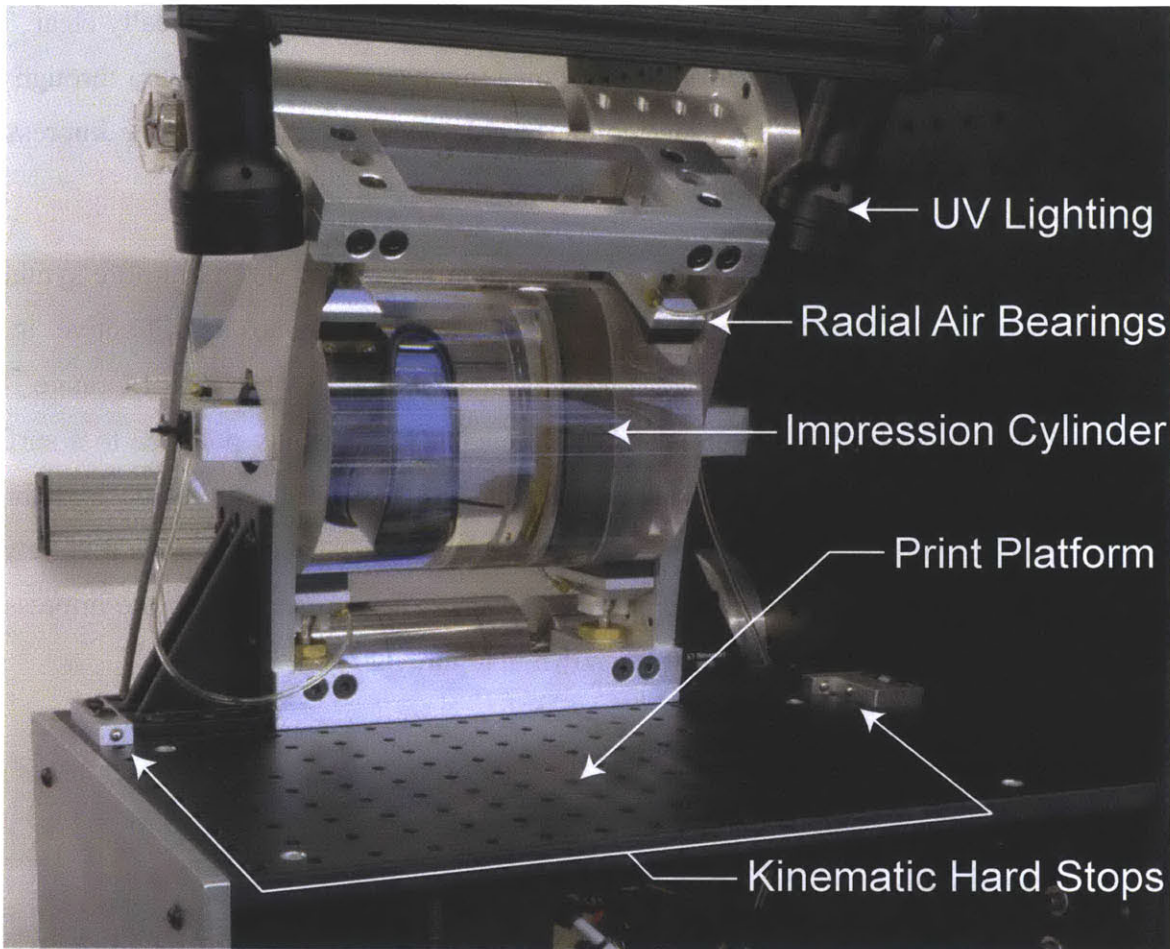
The impression roll assembly installed on the print platform. The clear impression cylinder is held in place by air bearings, which are mounted in the impression roll frame.
